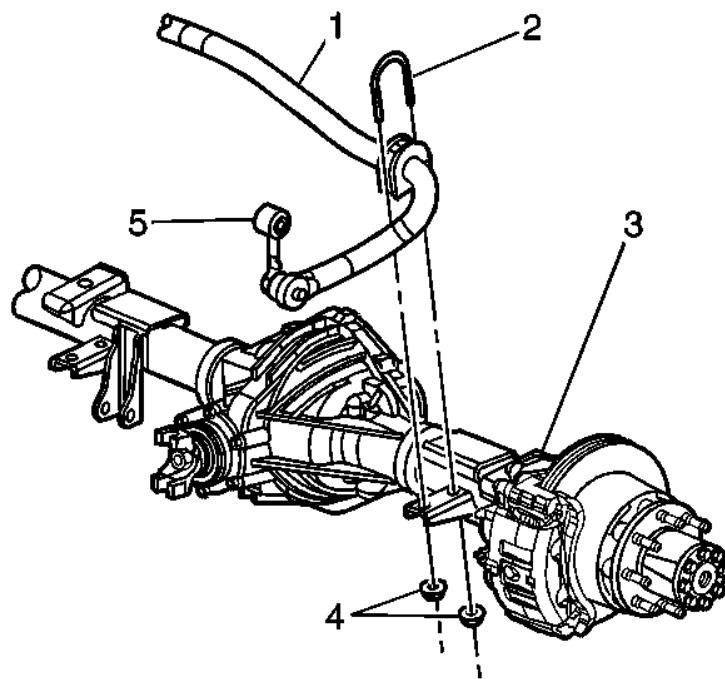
Stabilizer Shaft, U-Bolts, Nuts & Axle
